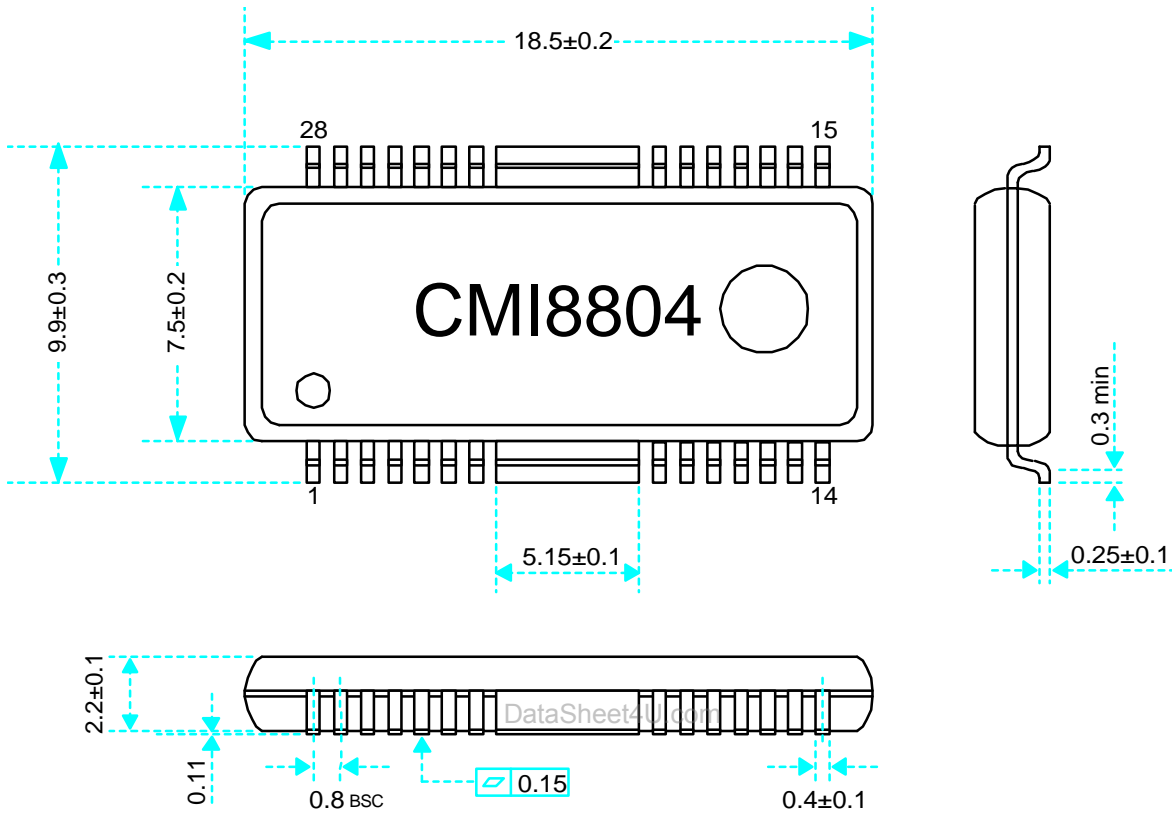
CMI8804 Package Dimensions (In Millimeters)
